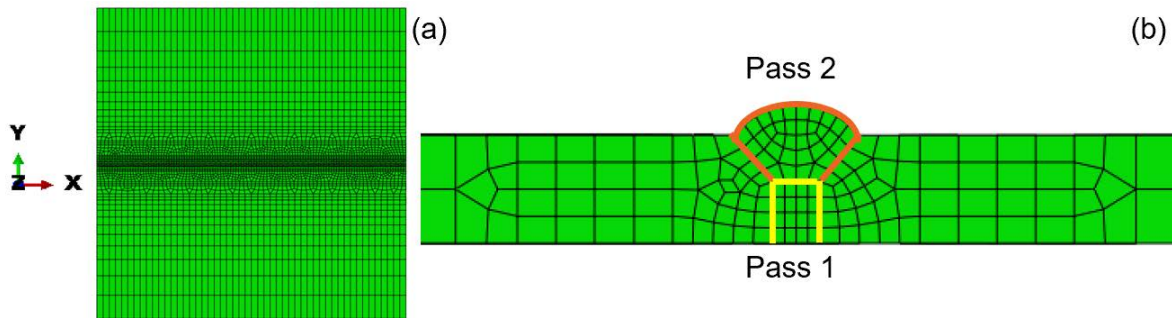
Mesh model of two small plates with a two-pass weld along the x-axis: (a) top view and (b) transverse cross-sectional view of the two-pass weld
